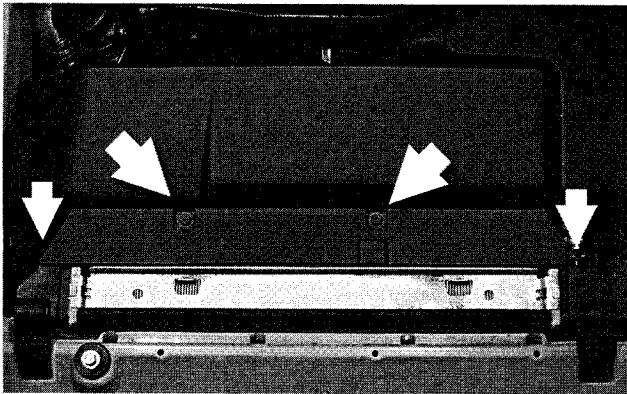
Fan shroud retaining rivet (arrow). Pry out center pin and remove rivet. Rivet design may vary depending on model and model year.
